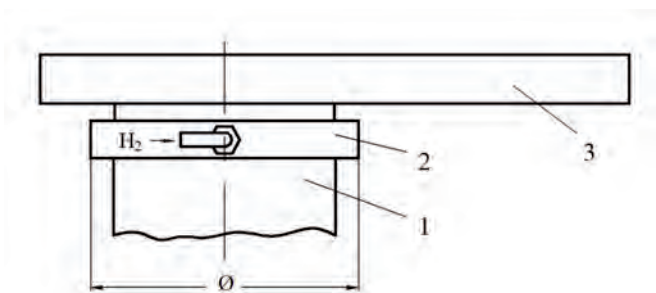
The installed universal plate: 1 – intake manifold; 2 – constructed plate; 3 – box of air filter
